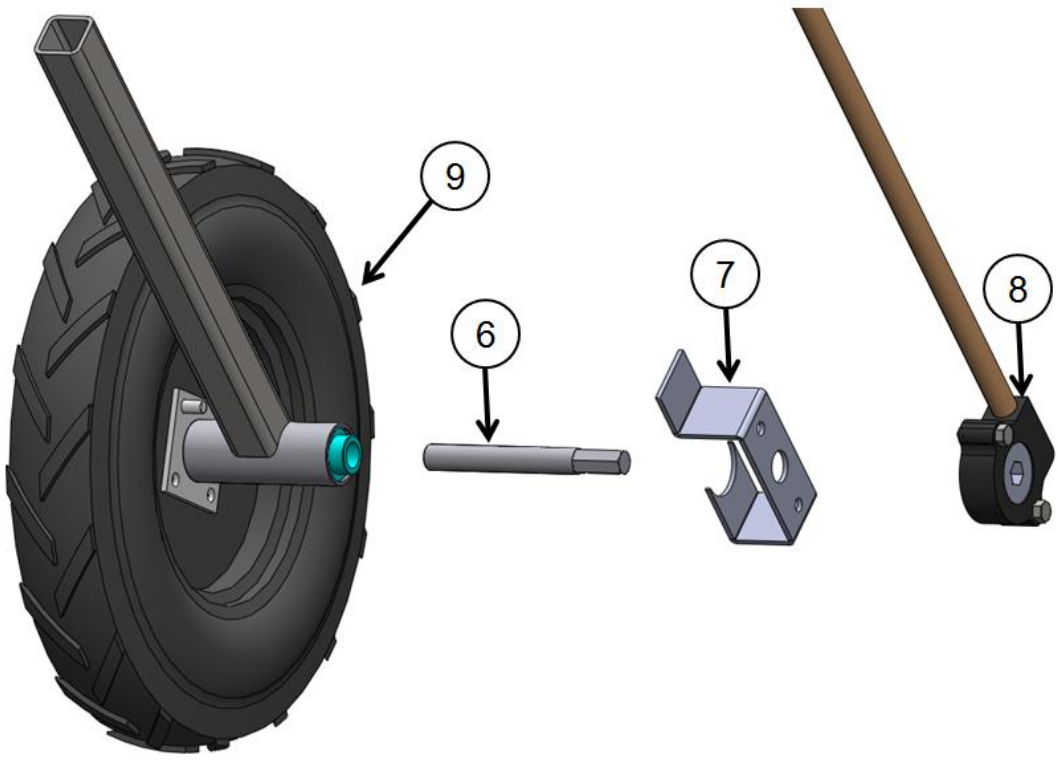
Exploded flexshaft drive design input assembly. Permission pending
